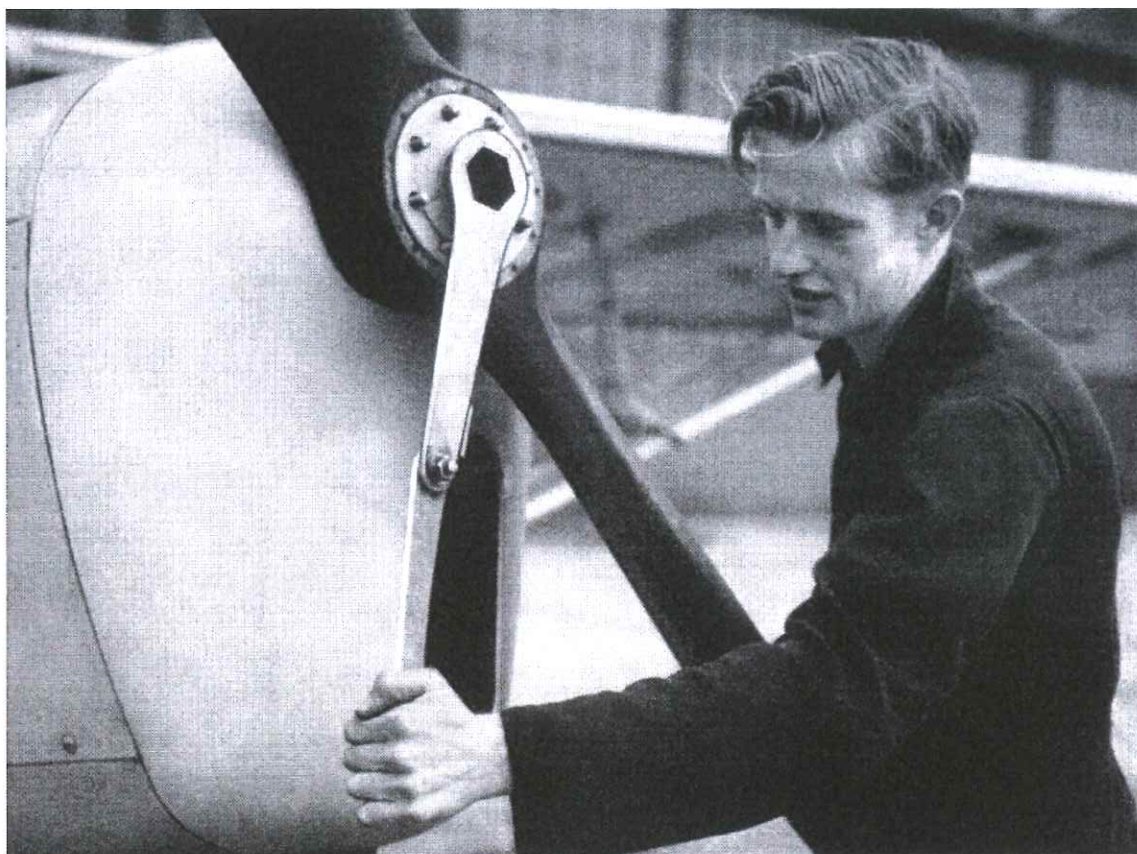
Removing crankshaft nut with special spanner FB.807, using propeller to prevent the crankshaft turning.
